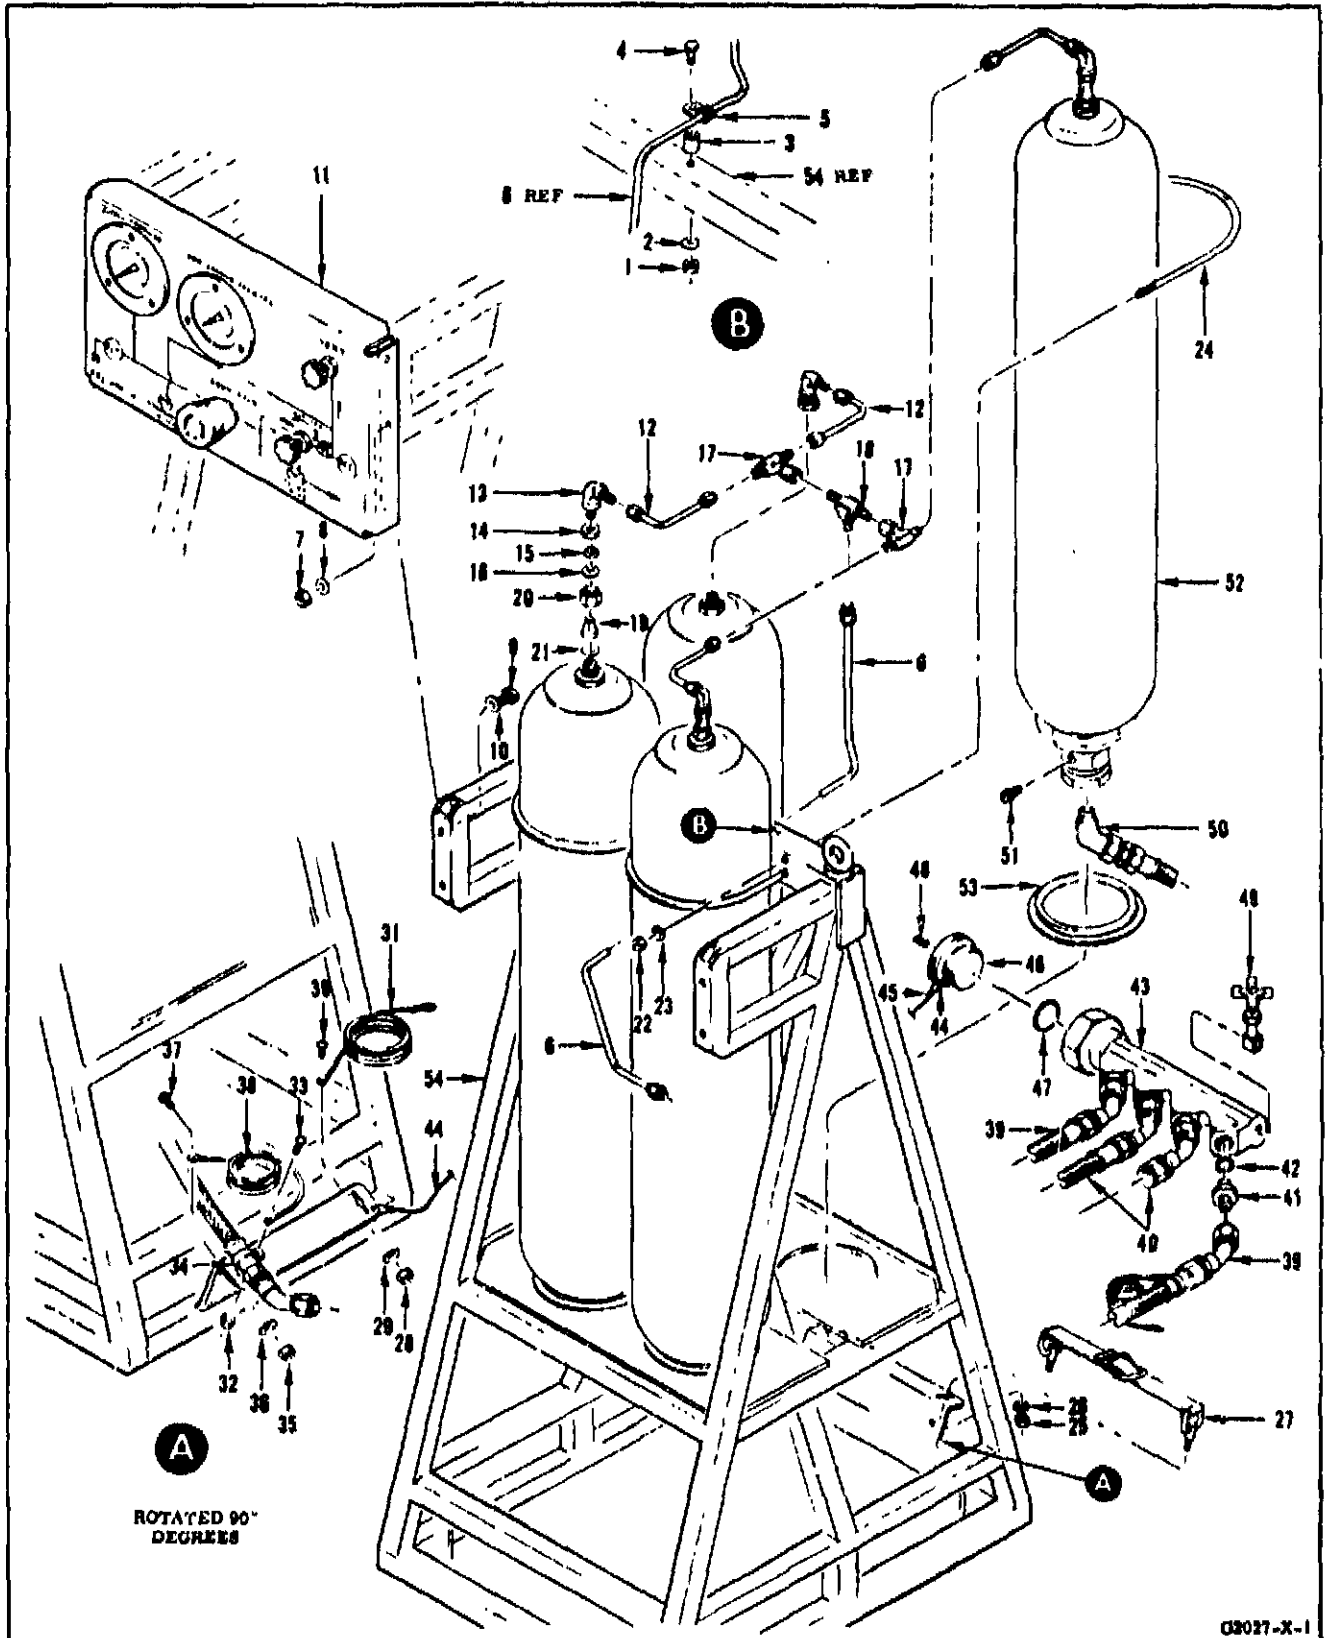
Disassembly of Accumulator Unit (Sheet 1 of 2)
